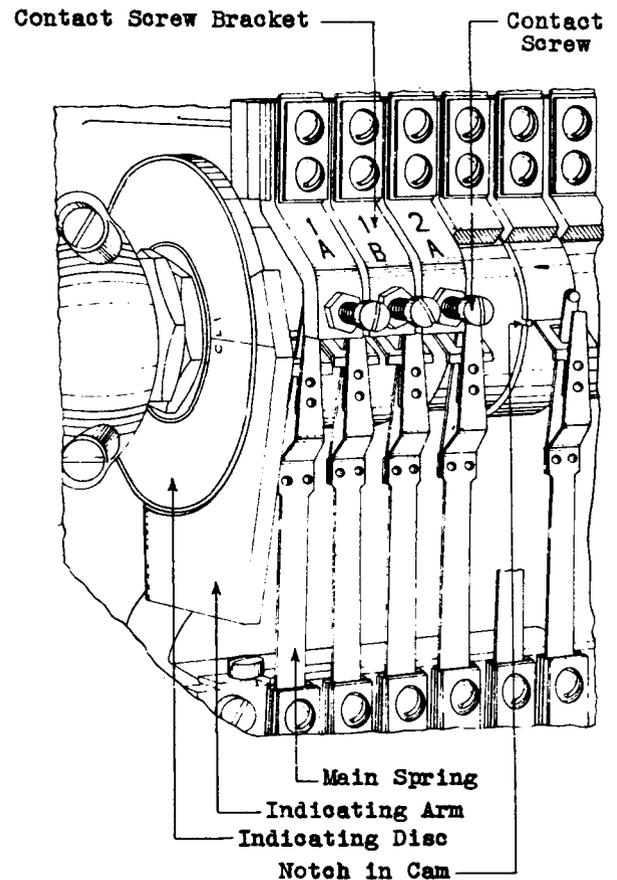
Indicating Disc of the Low Speed Cam Shaft of the 170-A Interrupter
